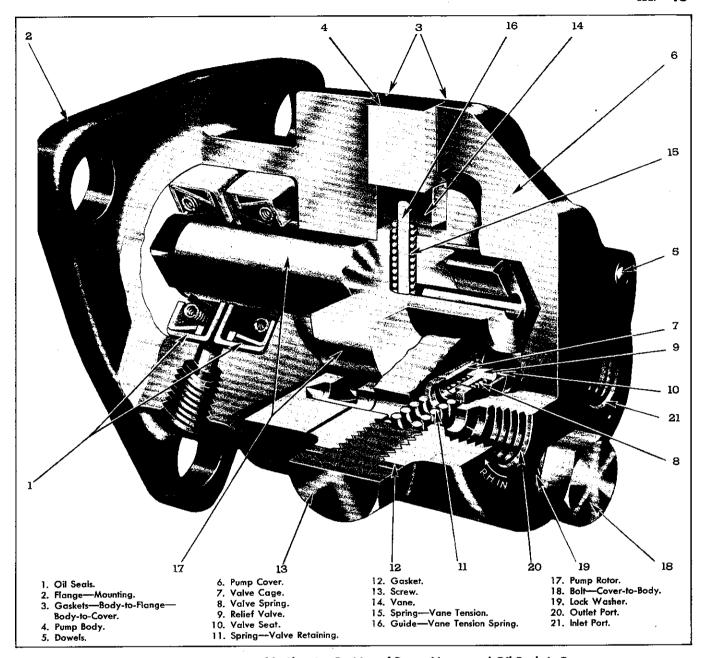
Fuel Pump Assembly Showing Position of Rotor, Vanes, and Oil Seals in Pump. (Valve, Valve Seat and Cage Arrangement for RC, RD, LC and LD Engines Shown.)
